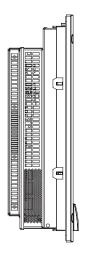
Dimension drawing of the key panel device with 12" display and expansion frame
